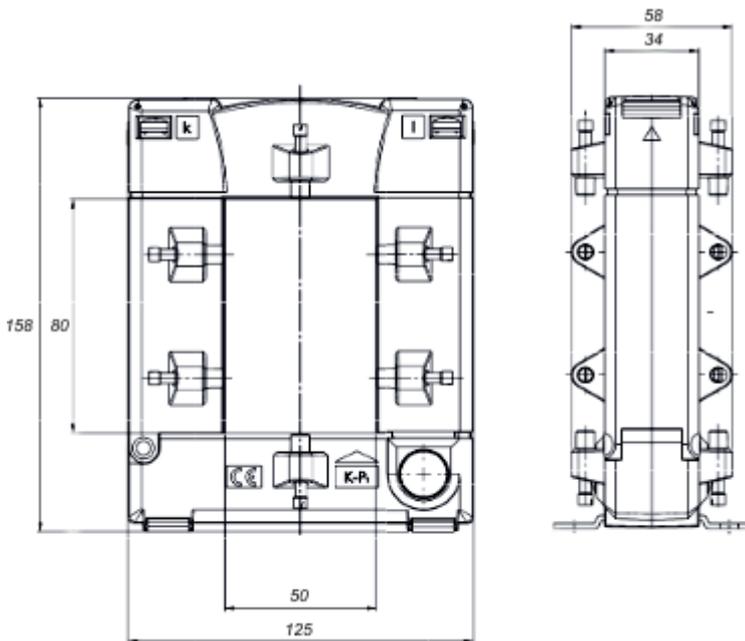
SCT4716-0018 dimensions, all dimensions in mm
